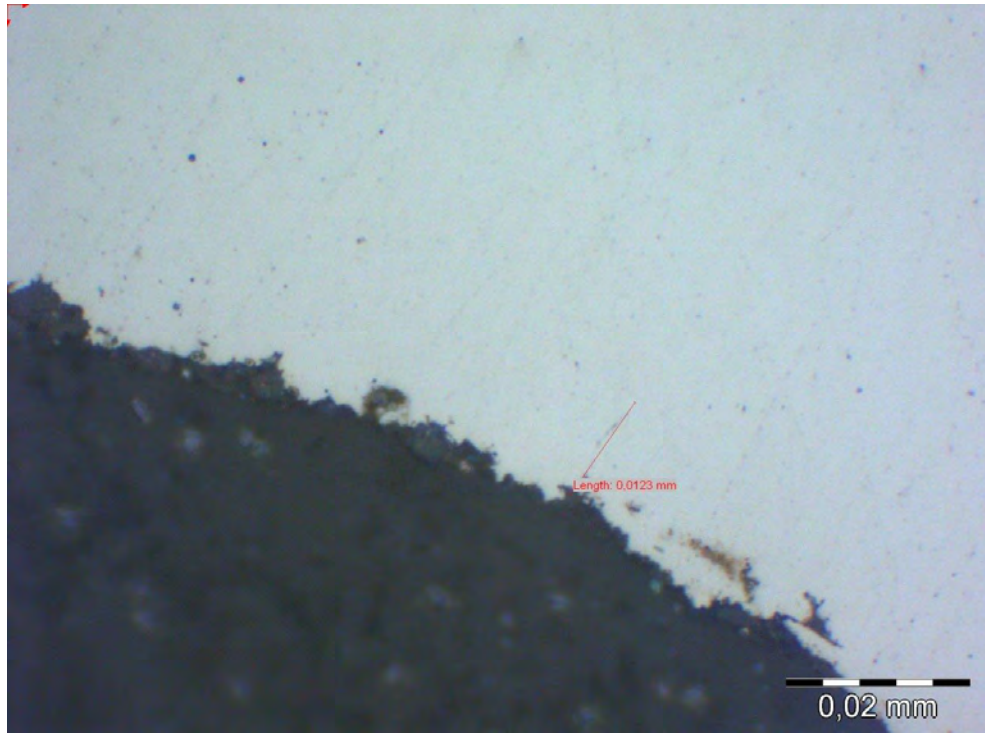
Cut four in crack at segment A, fifth ridge on barrel no. 14389
